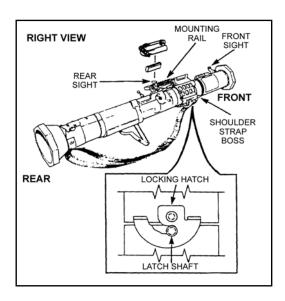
M136 (AT4) installation (locking latch and shaft).
